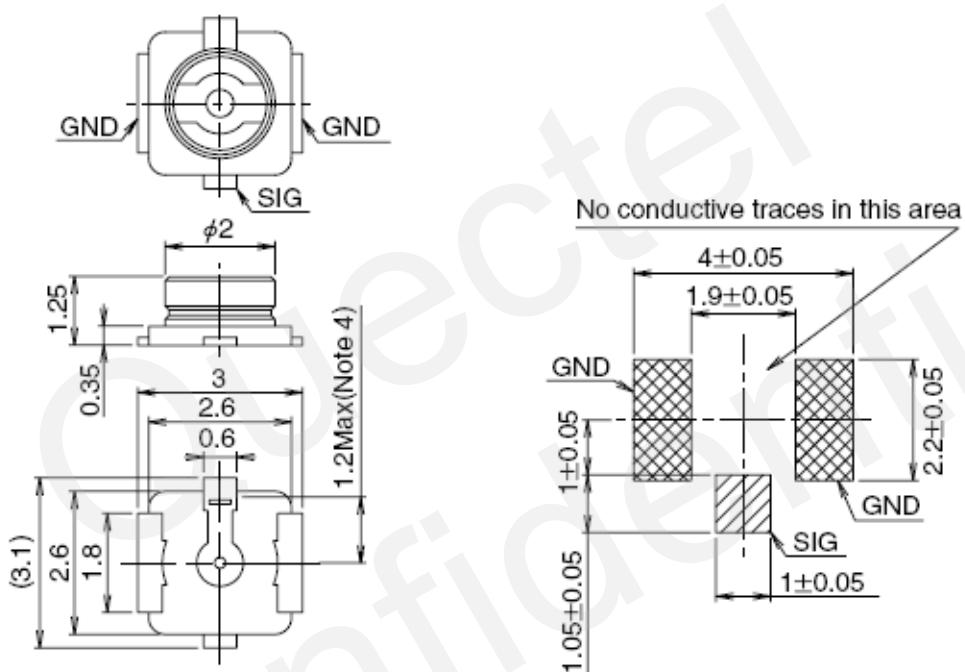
Dimensions of the UF.L-R-SMT Connector (Unit: mm)
